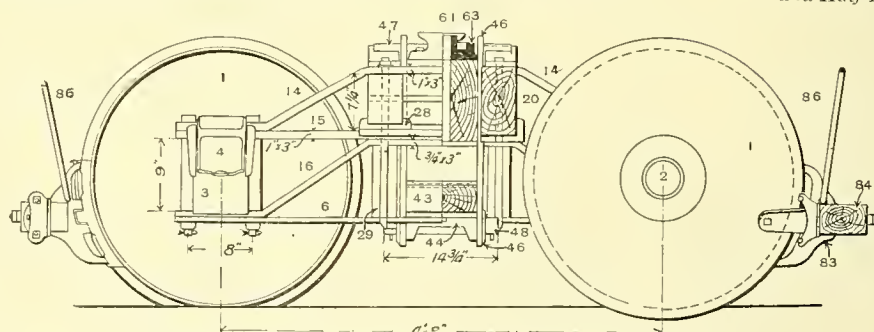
Half Side Elevation and Half Longitudinal Section.
